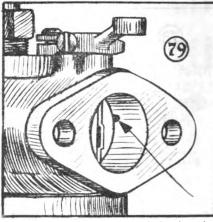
The low-speed hole should show between .02 and .04 when the throttle is shut on the Holley
